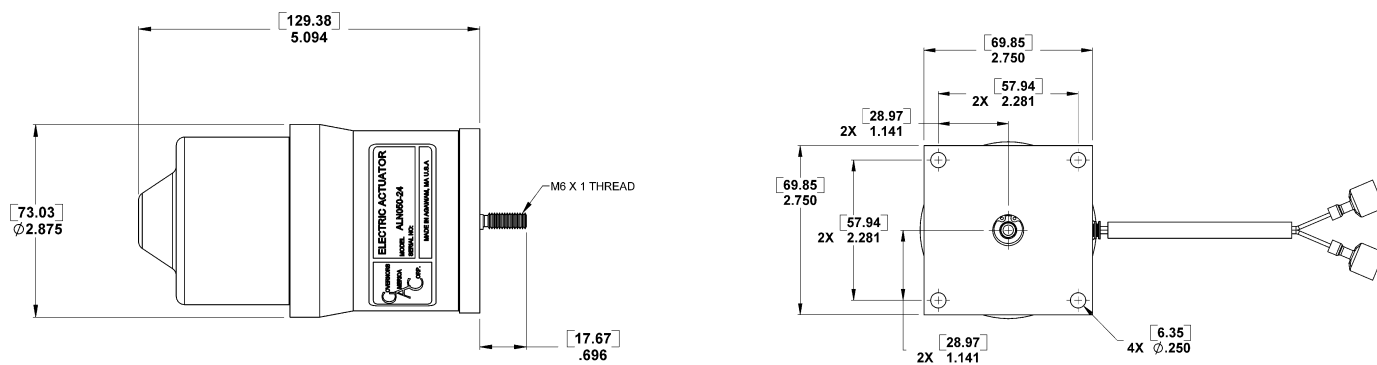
ALN050 Outline Dimensions in: inches, [mm]
